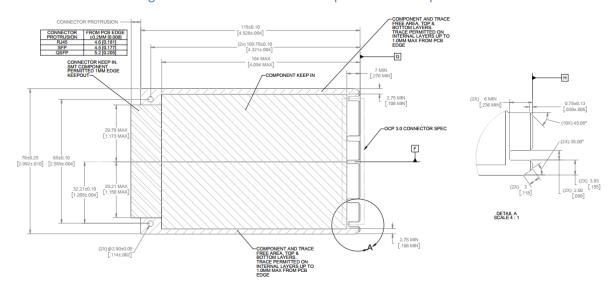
Small Form Factor Keep Out Zone – Bottom View
